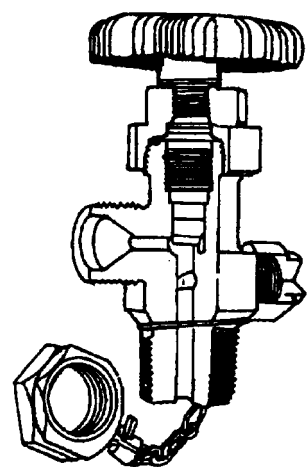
Cutaway View of Oxygen Cylinder Packless (Diaphragm-Type) Valve
